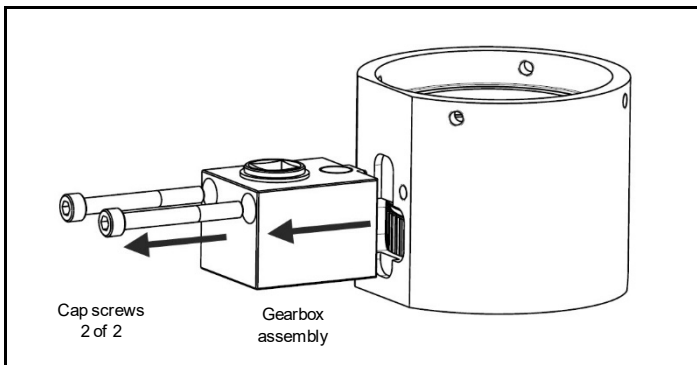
Separation of bridge assembly and gearbox assembly
